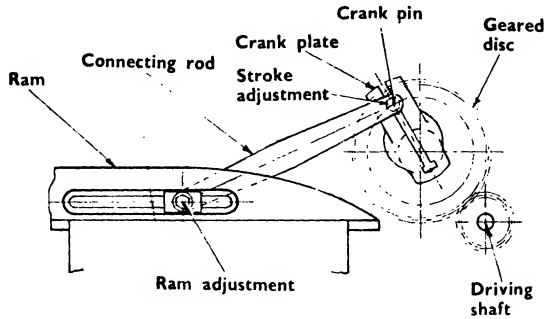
B. OFFSET CRANK QUICK RETURN DRIVE FOR SHAPER
